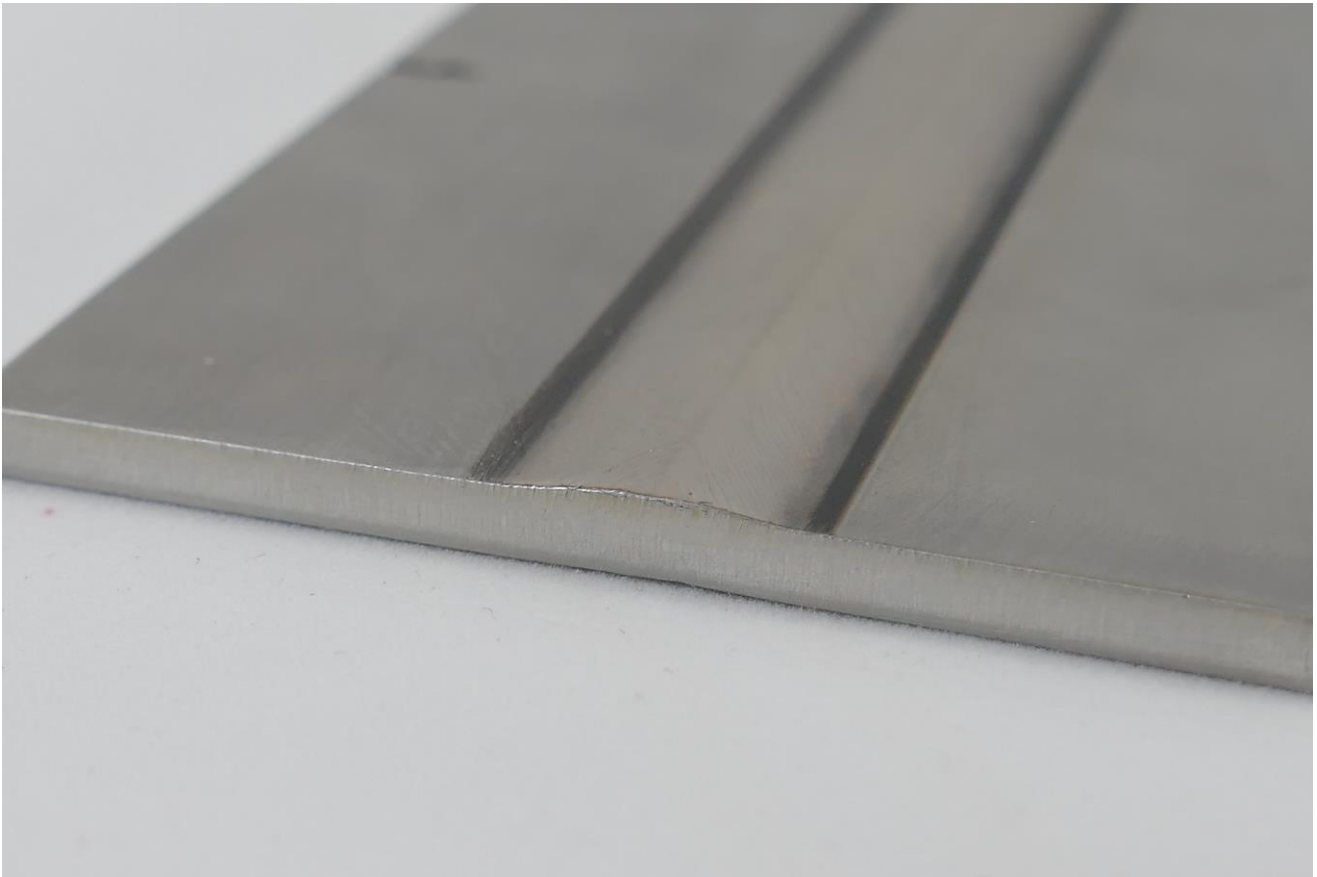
InFocus, High Performance TIG weld, Stainless Steel $t = 6$ mm
